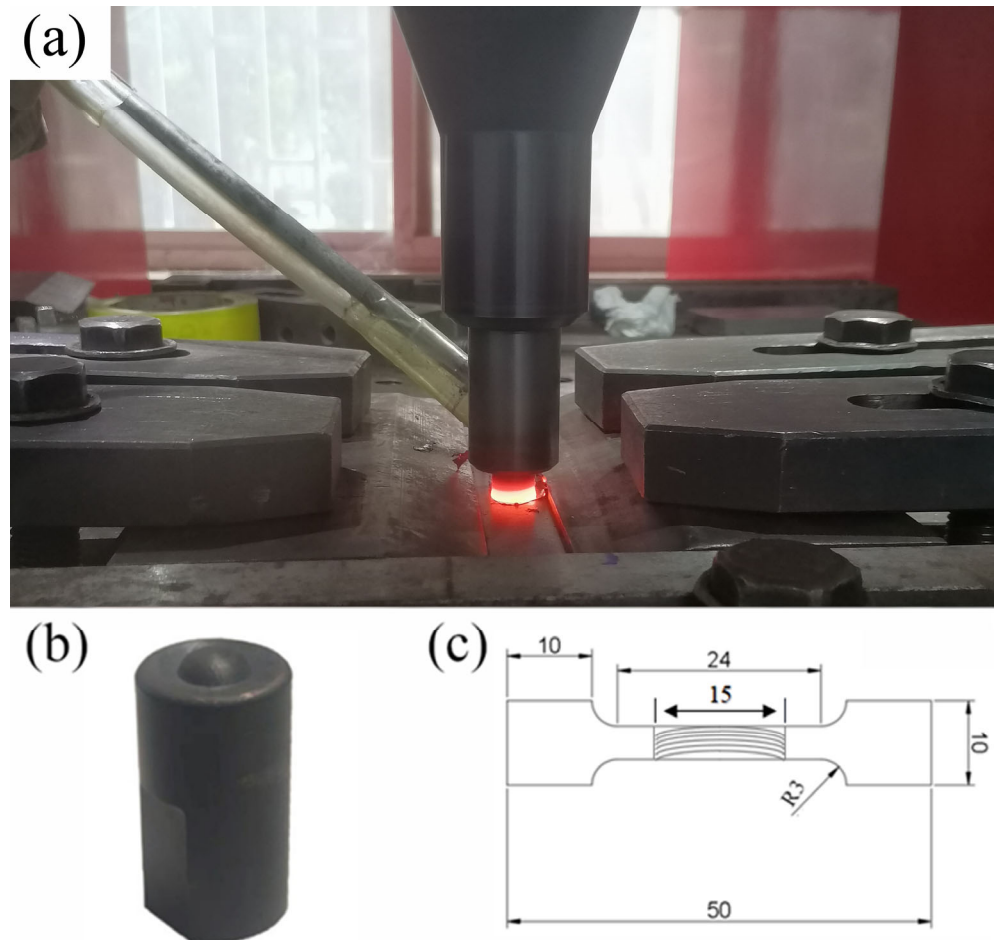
(a) Photo taken during the FSW of DP steel; (b) the appearance of pcBN rotating tool; (c) dimension of tensile specimen.
